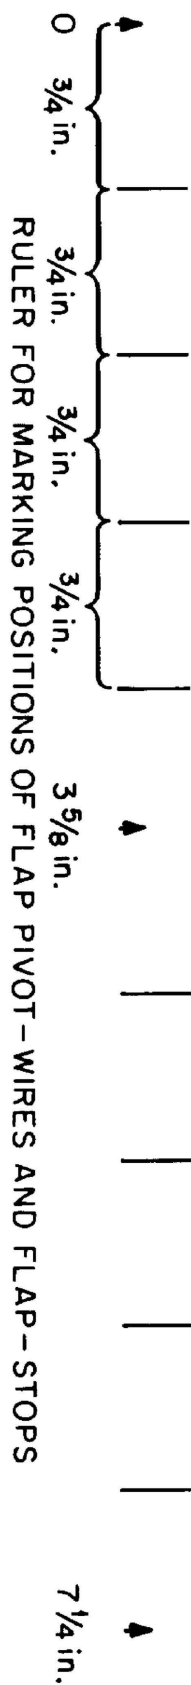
Completing the frame. ORNL- DWG 66-12322A
